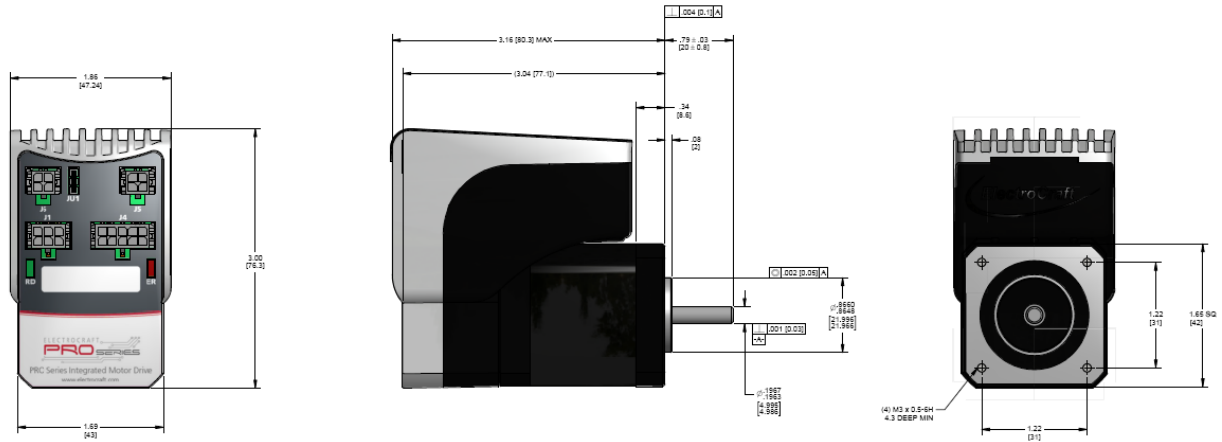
PT42-A55V48A-0-D-CAN mechanical dimensions.
